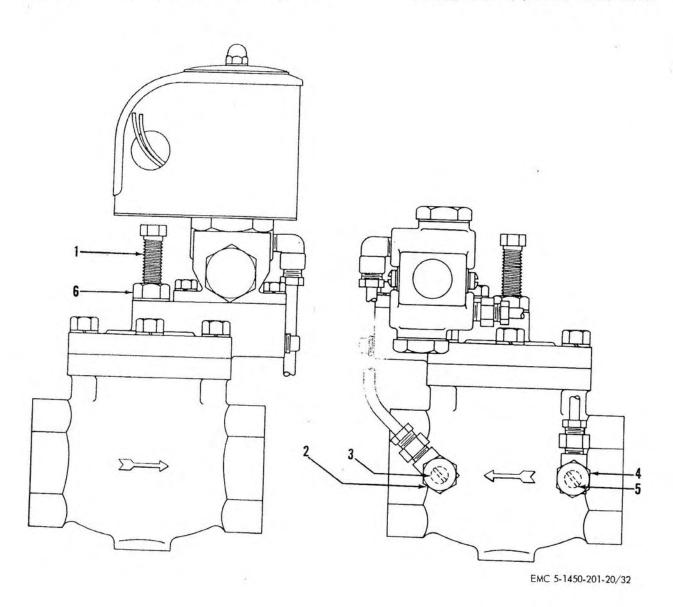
Lowering valve S4 adjustment (ASCO type).
